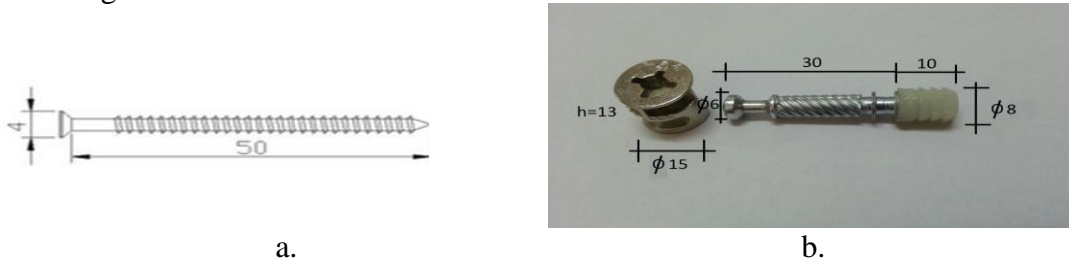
The (a) screw and (b) minifix used in the L-type corner joints
